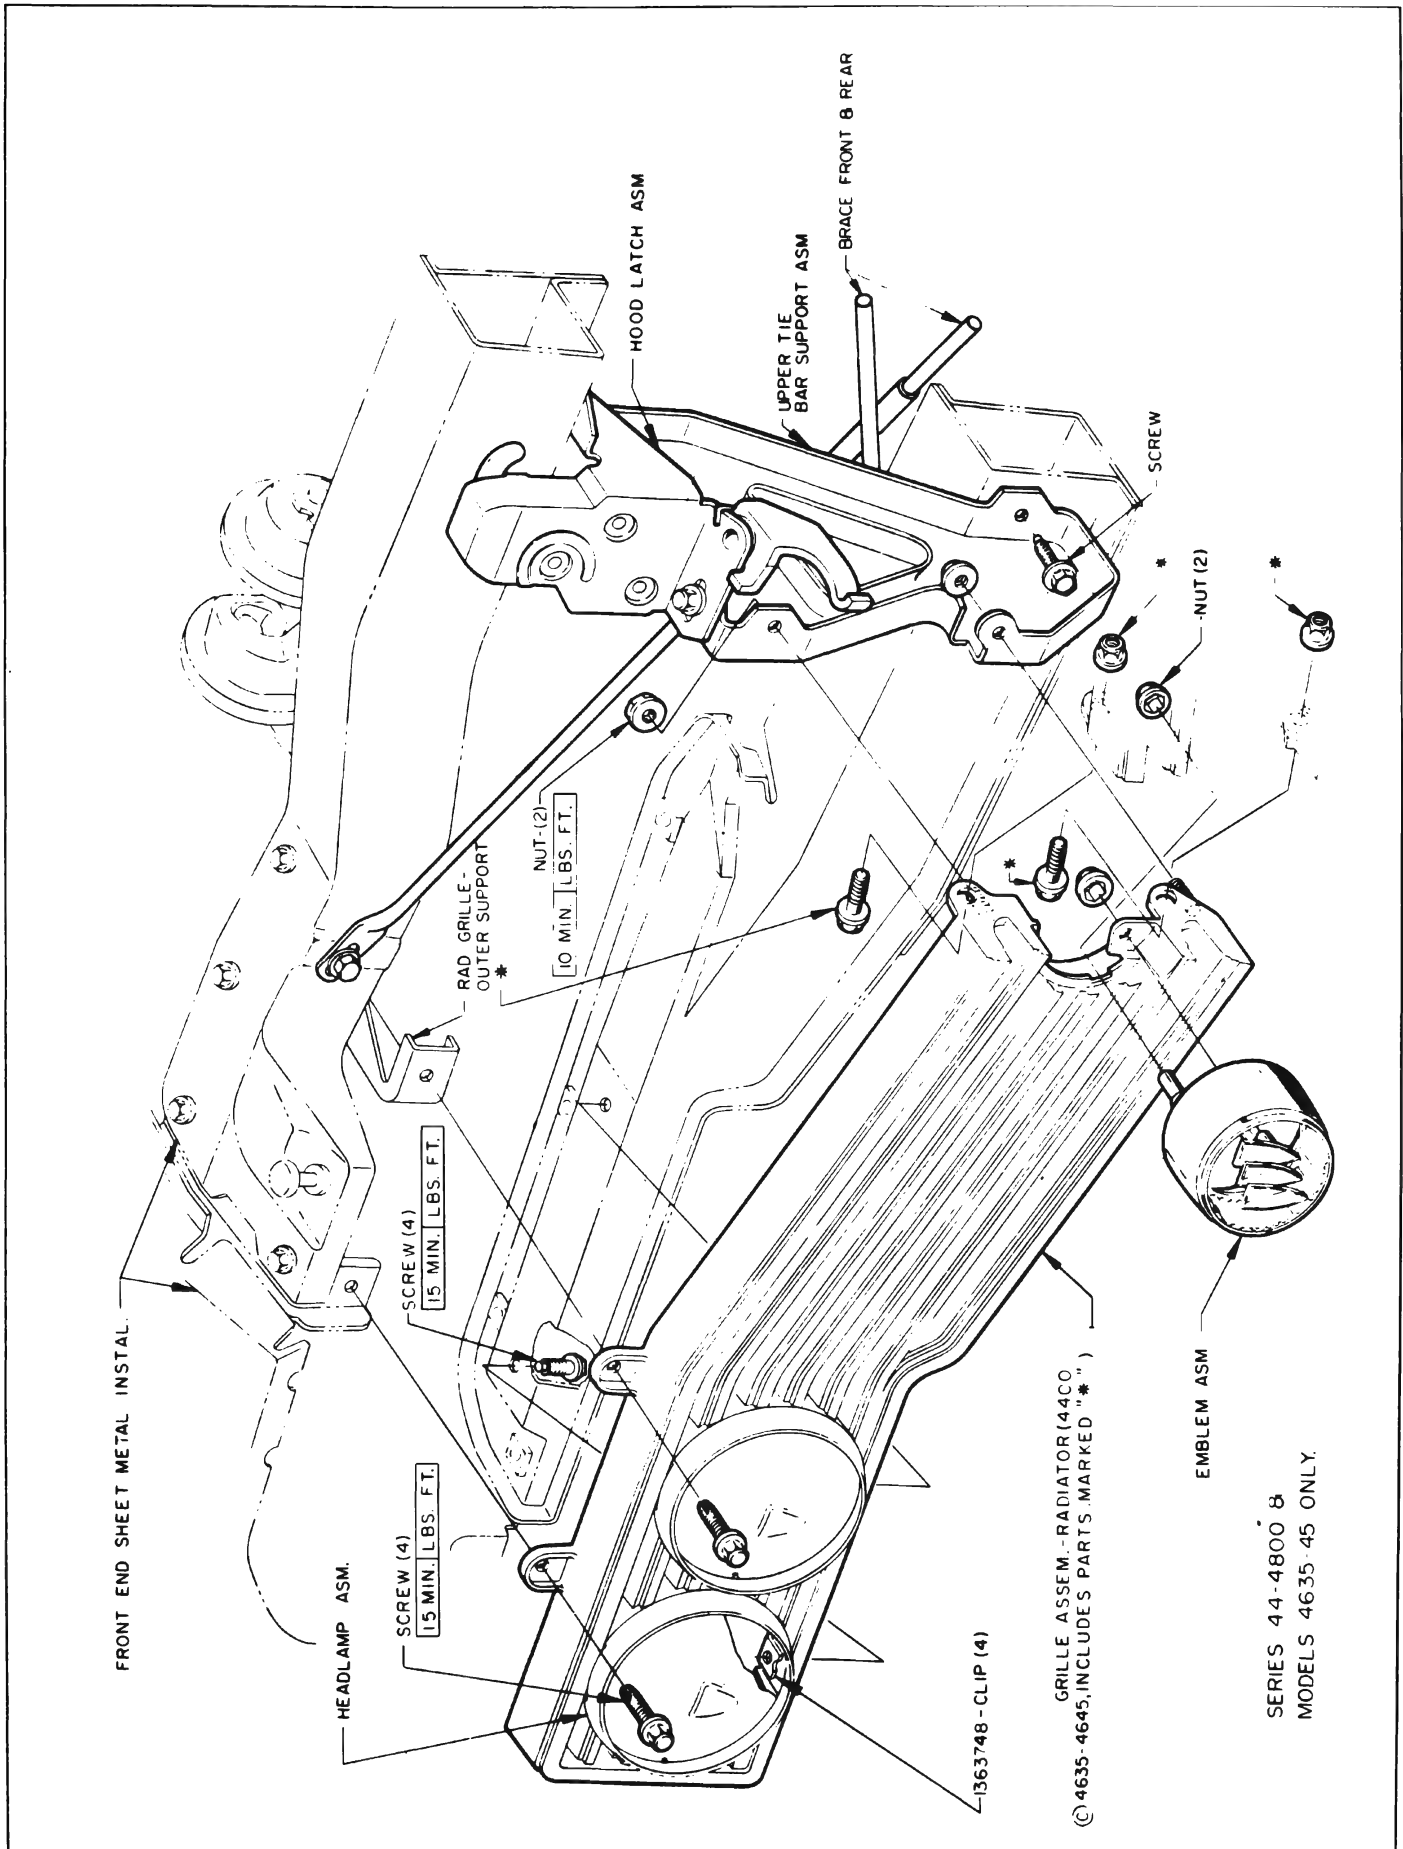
Radiator Grille, Headlamps, & Front End Installation—44-4635-4645-4800 Series
